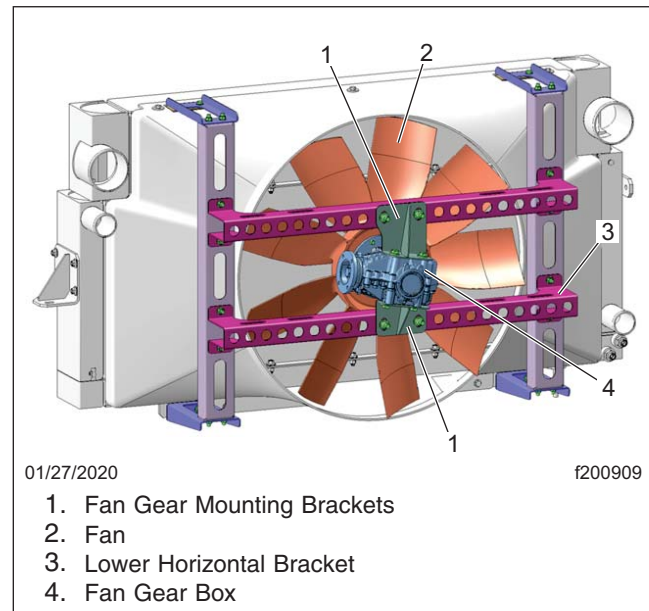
, Bolt-Together Fan Cage with Four Fan Gear Box Mounting Bolts (per bracket)
